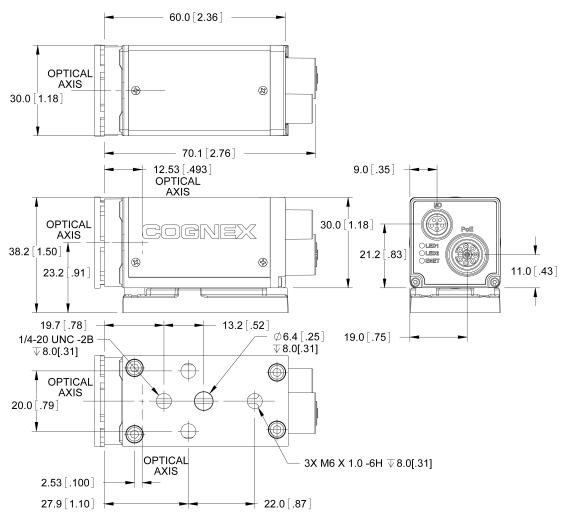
In-Sight Micro Vision System Dimensions (with Mounting Block)
